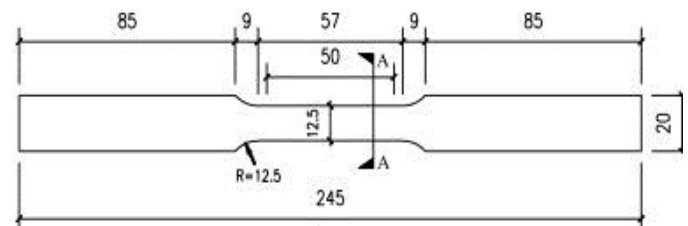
Flat tensile specimen drawing (in mm) [ASTM E 8]
